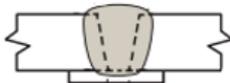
Single-V-groove weld | B-L2a-S and B-U2-S
